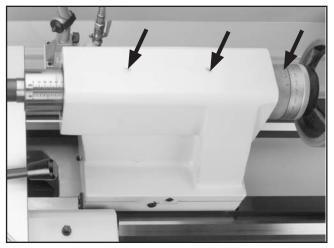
Tailstock ball oiler locations: 1 ball oiler on the tailstock handwheel hub and 2 ball oilers on the tailstock housing top.
